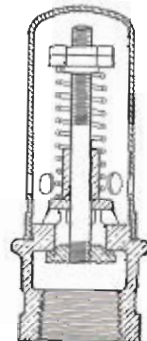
Webster Size 3/4 Inch Adjustable Vacuum Breaker
